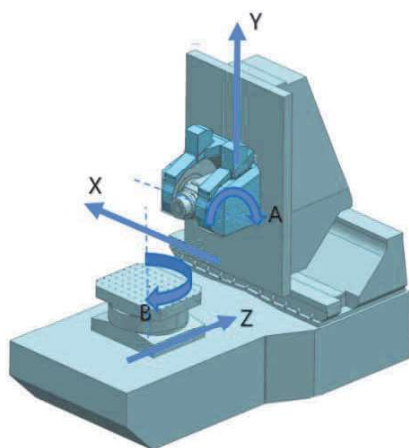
Horizontal machining center with a rotary table and tilting head (HT)
